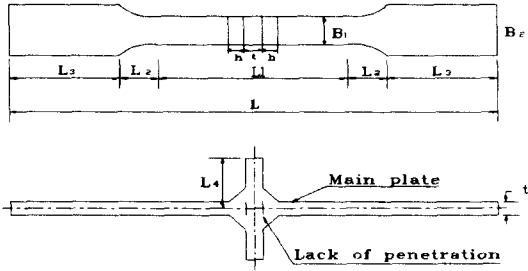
Dimensions of fatigue specimens of fillet welded cruciform joints
